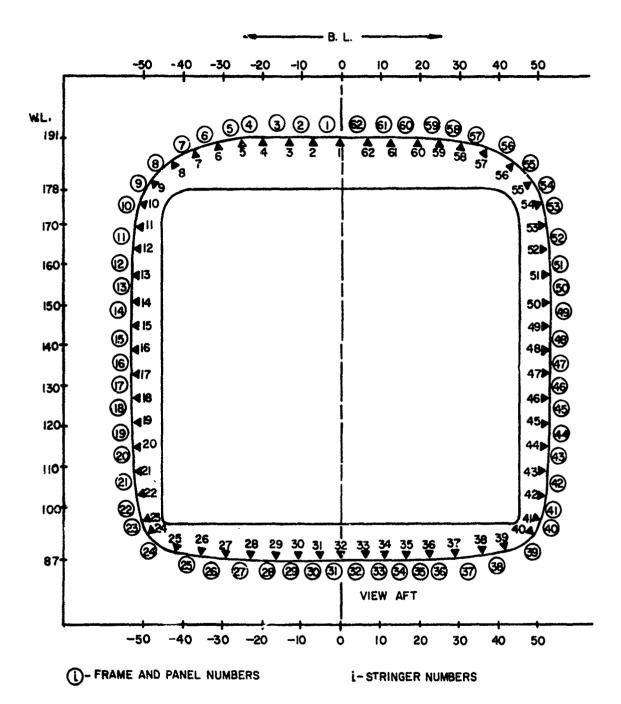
Sixty-Two Stringer Locations, FS 162-522
